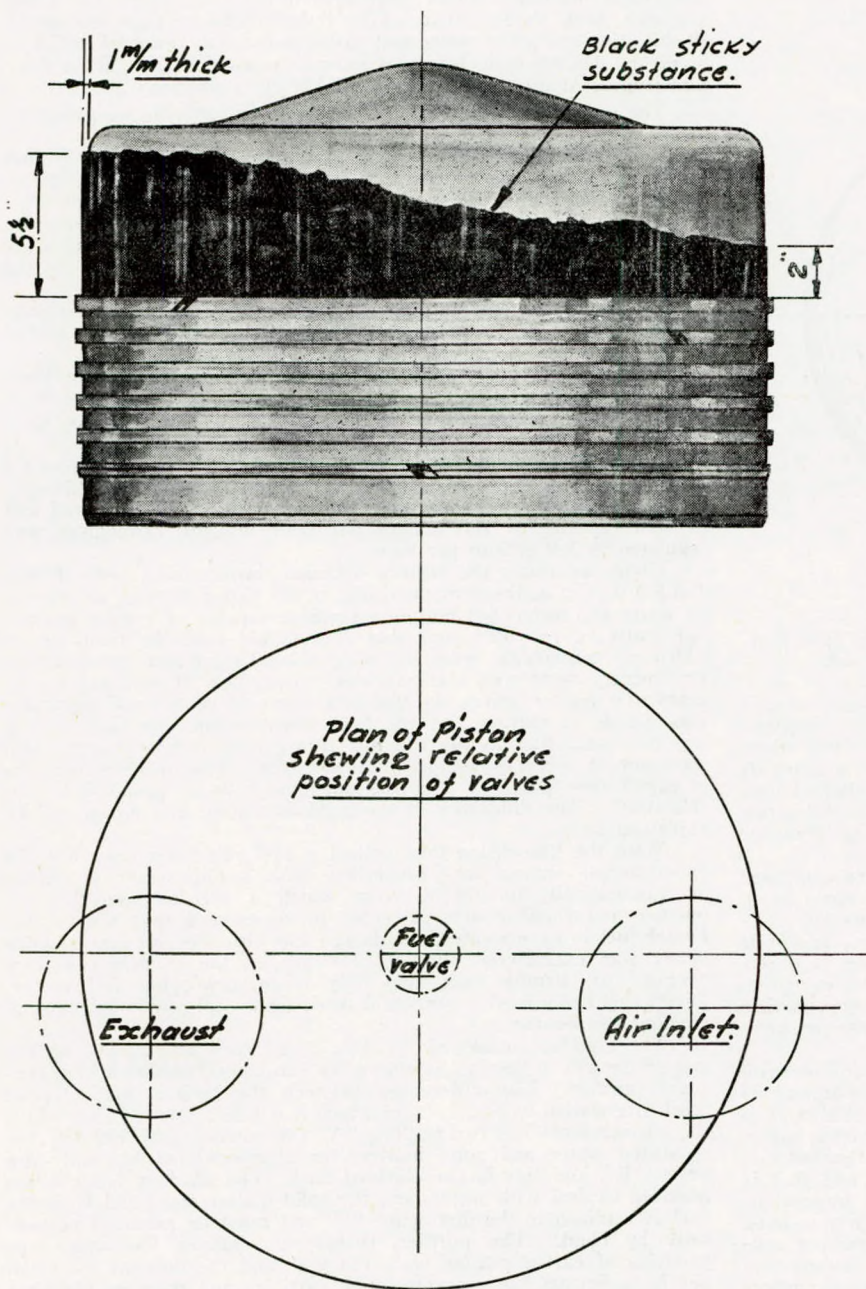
Piston head of experimental engine showing formation of deposit.
